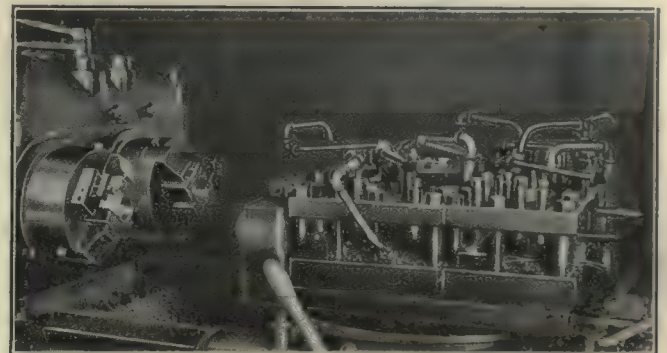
USING THE DOUBLE-SPINDLE HARTNESS FLAT TURRET LATHE
